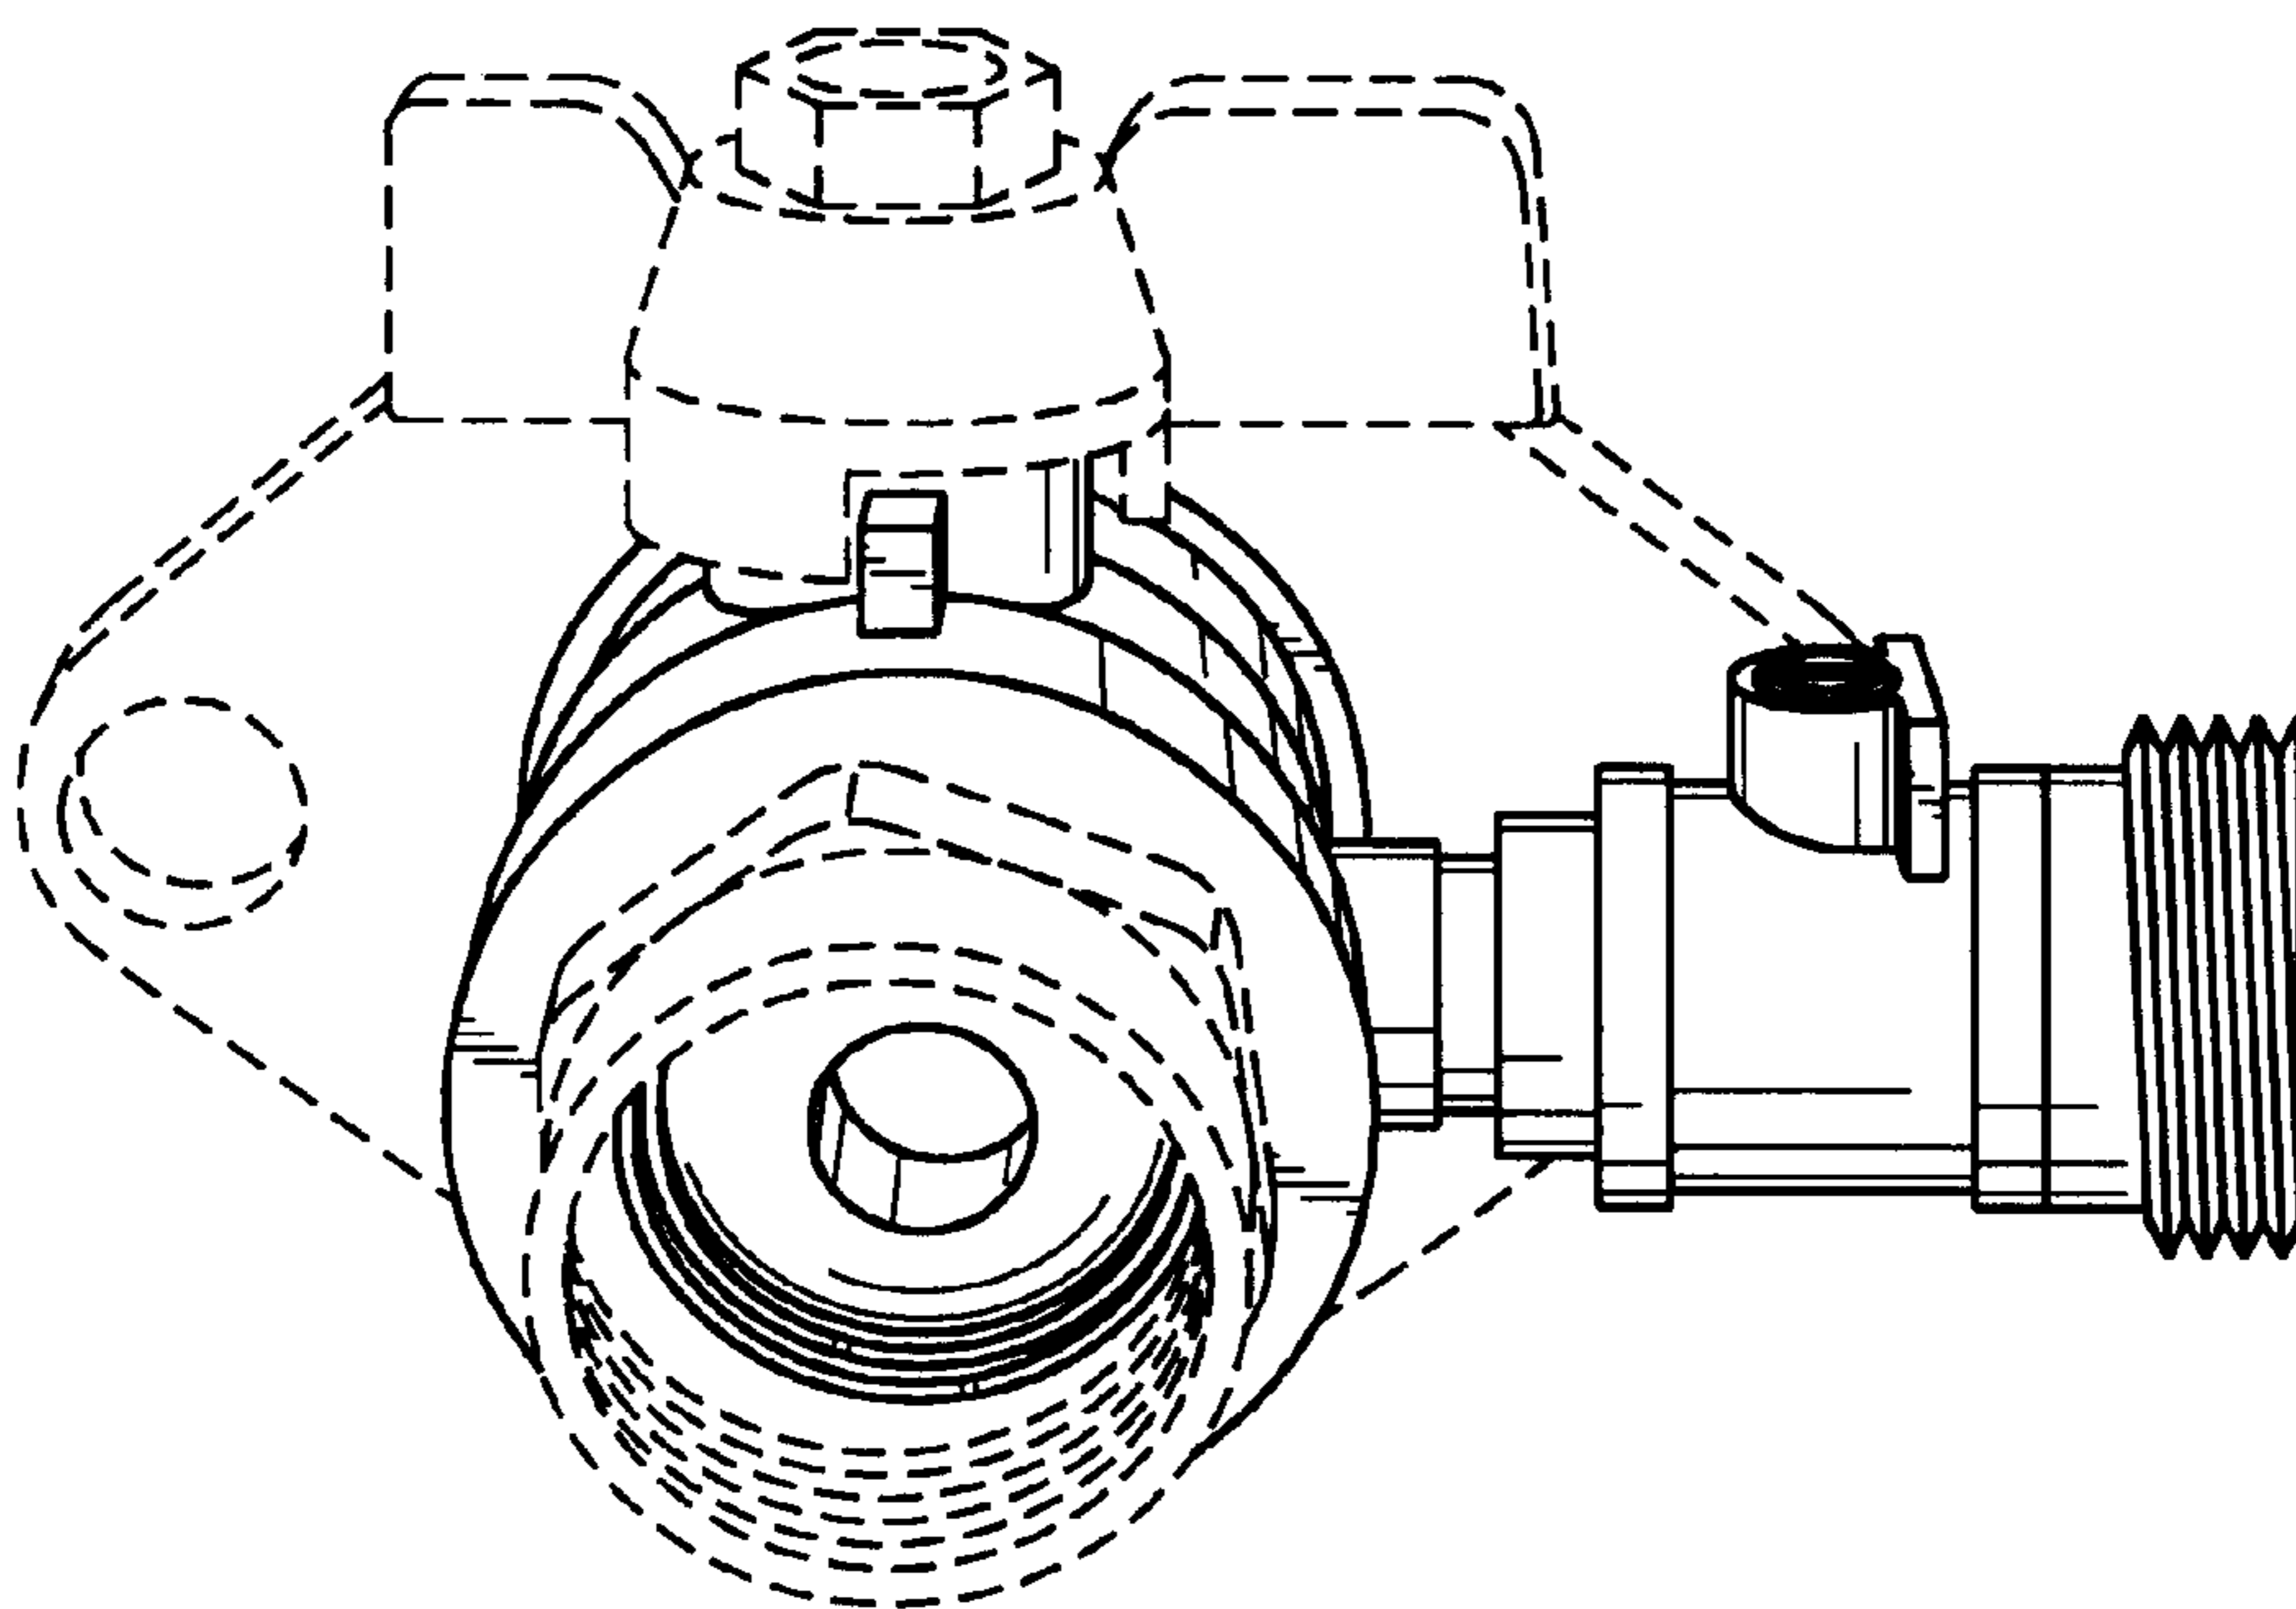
is a bottom view thereof with the main ball valve open; the position of the drain valve not possible to determine in this view;
